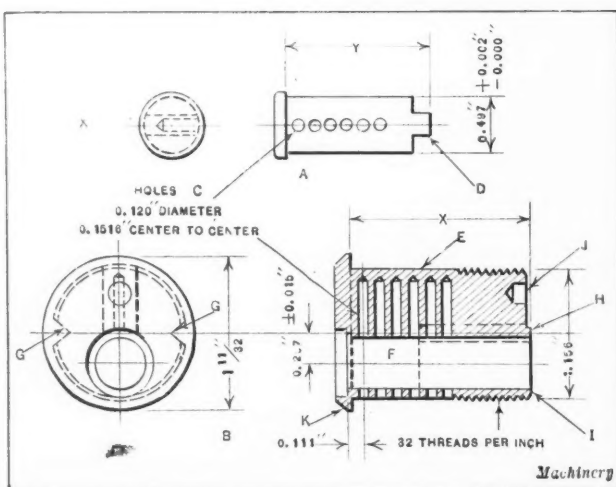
Details of a Door-lock Cylinder and its Mating Plug
